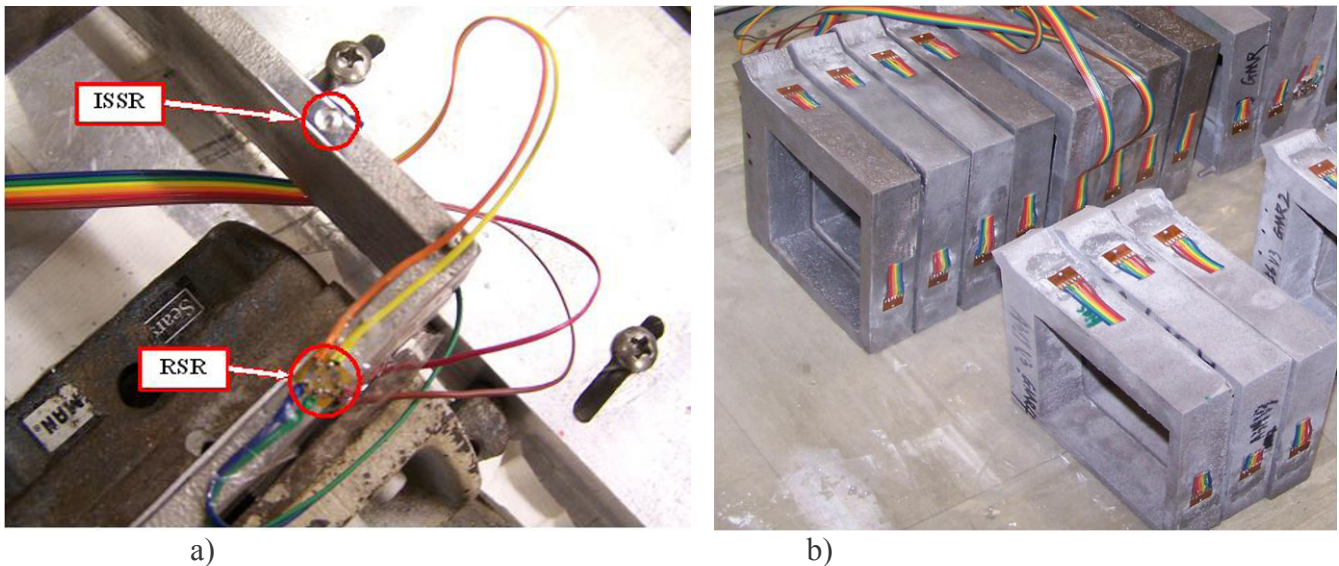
a) RSR hole-drilling and ISSR/ring-core on top of the water-quenched aluminum casting; b) RSR hole-drilling measurements on the side of air quenched and water quenched castings
